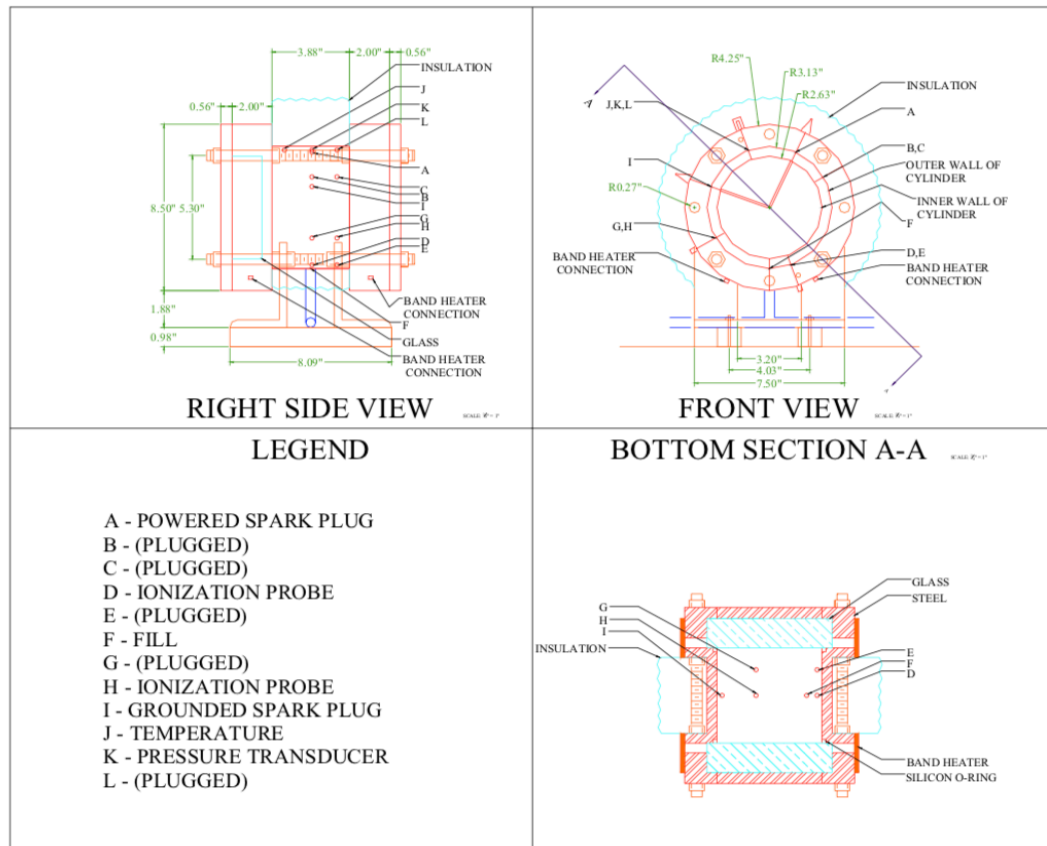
Illustration of the dimensions of the cylindrical combustion chamber
